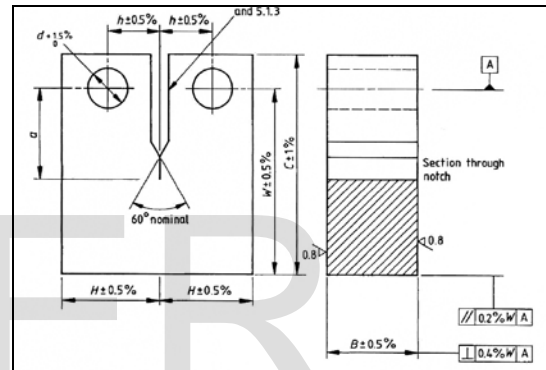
Specimendimensionsforfracture toughness testing.(CT)
